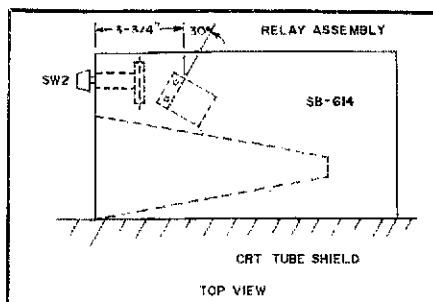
Physical placement of the relay assembly in the SB-614. The assembly is tilted approximately 30°. Inches (") \times 25.4 = mm.
